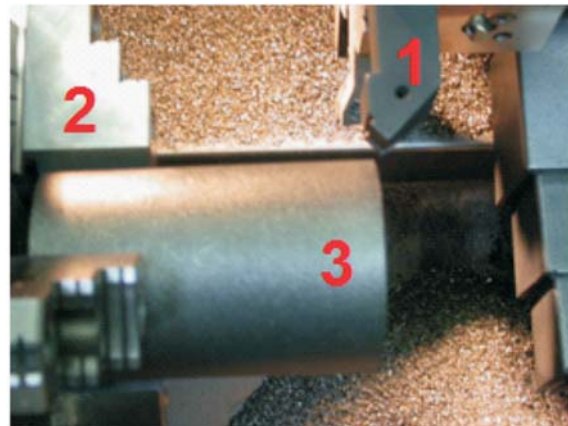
Machining system: 1 - tool-holder; 2 - chuck; 3 - workpiece
